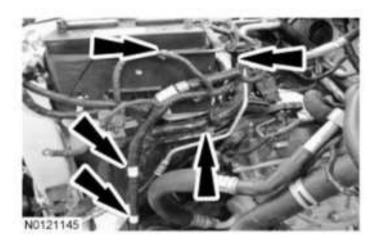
Locating Wiring Harness Retainers Courtesy of FORD MOTOR CO.
